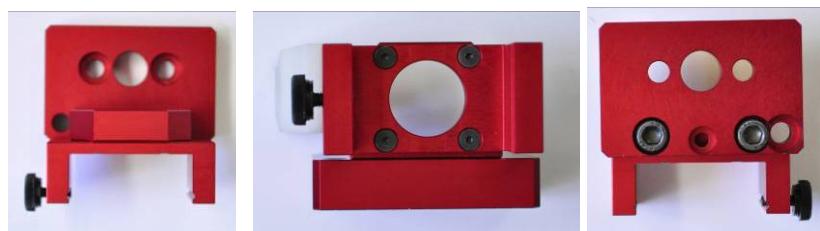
Camera holder (left) mounted on the adapter plate with the intermediate piece.
